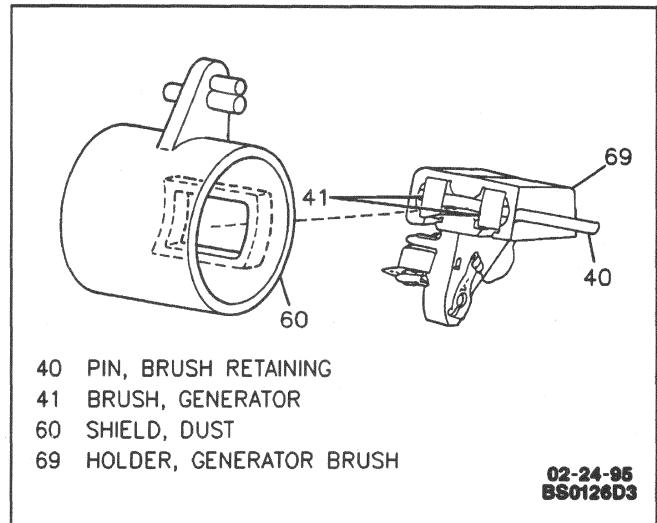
Generator Brushes Retained in Generator Brush Holder
